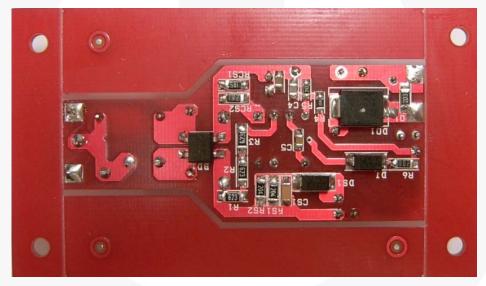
Bottom View Dimensions: 59 mm (L)  $\times$ 25.5 mm (W)  $\times$  20.0 mm (H)
